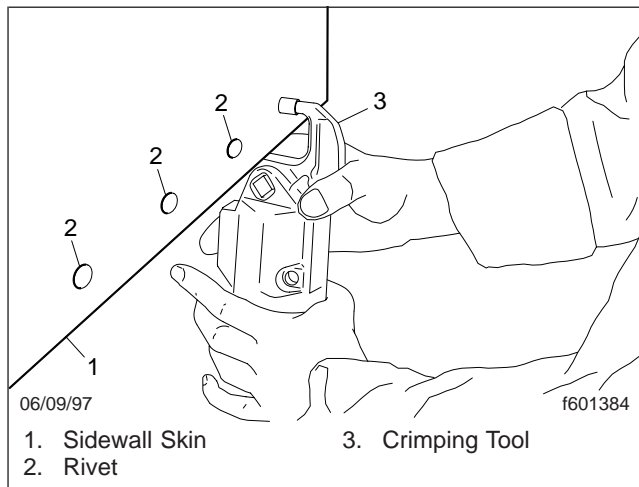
, Installing Rivets Along the Bottom Edge (with a crimping tool)
